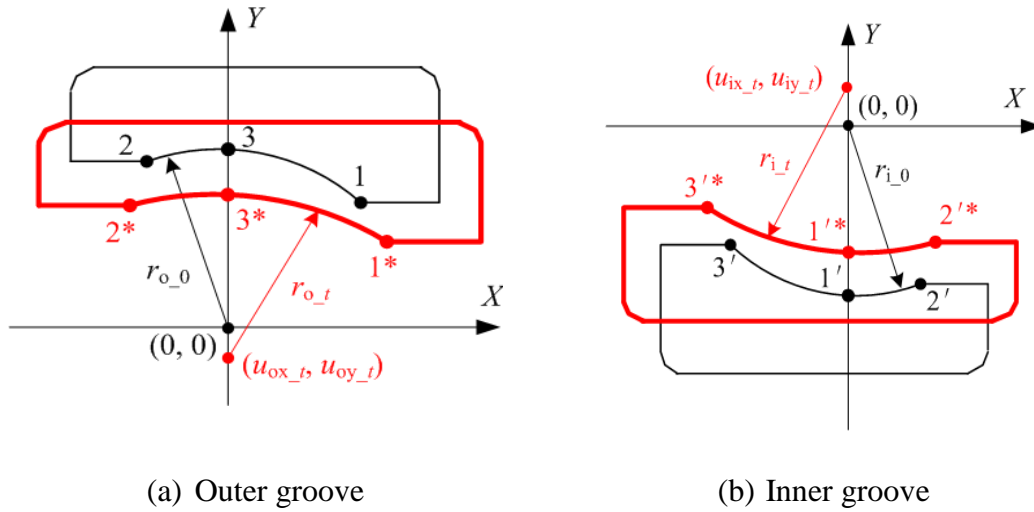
Thermal deformations of inner and outer grooves of angular contact ball bearing
